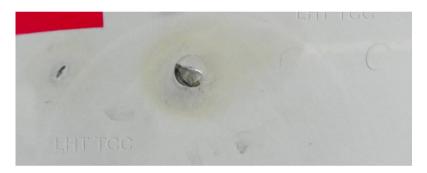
Two fasteners hit by lightning strike; other two undamaged (LHT, 2018)
